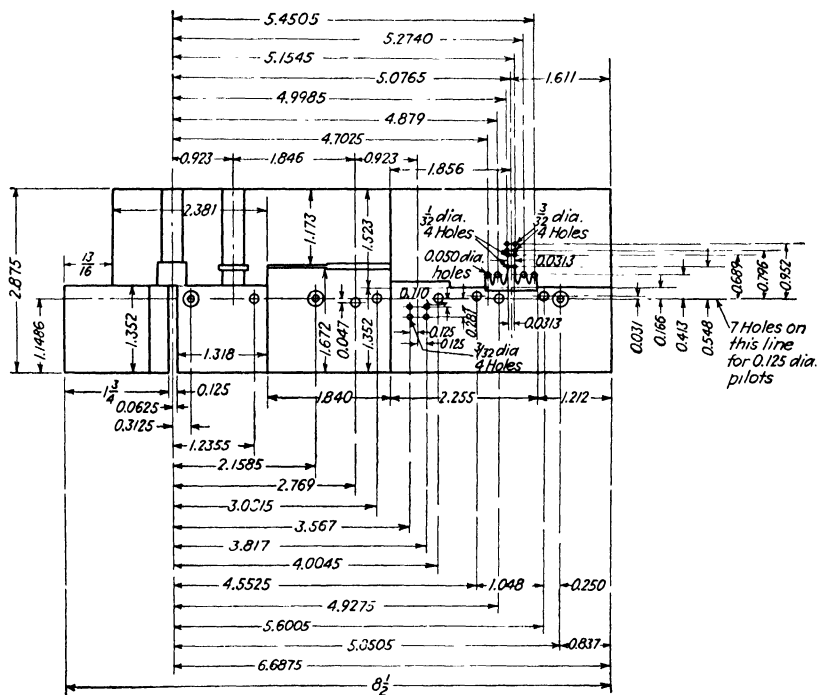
Jig-boring layout for the progressive die shown in Fig. 91. It is a typical layout of this character.
